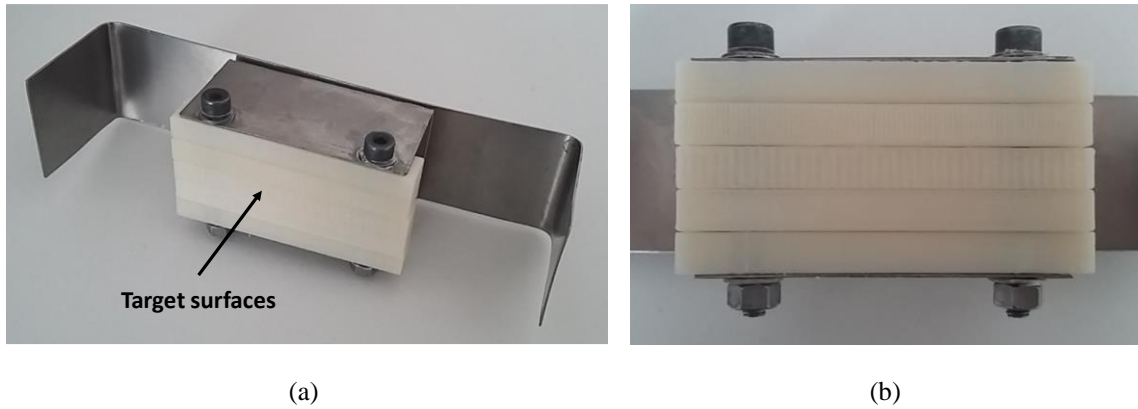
(a) Set of samples packed and mounted on the titanium support and (b) detail on the target surfaces.
